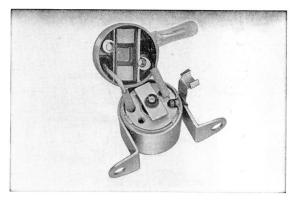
Solenoid disassembly (when the cover is opened)
